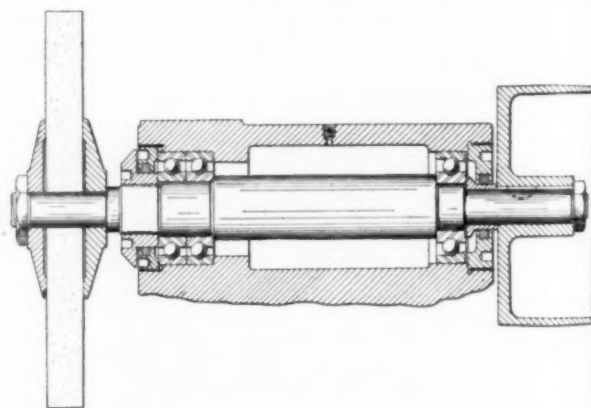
SPINDLE OF MEDIUM-SPEED PRECISION GRINDER USING DUPLEX BEARINGS IN CONVENTIONAL POSITION
